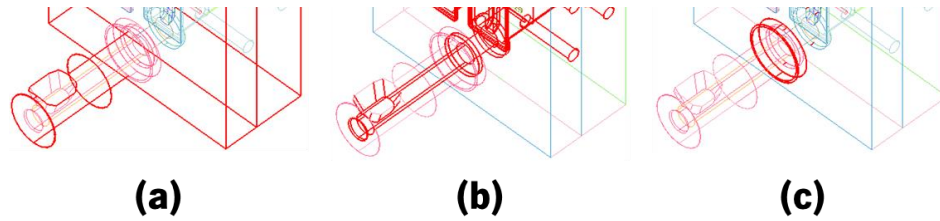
Assembly edges with different element size. (a) – edges with 20 mm size; (b) – edge with 4 mm size; (c) – edge with 1.25 mm size.
